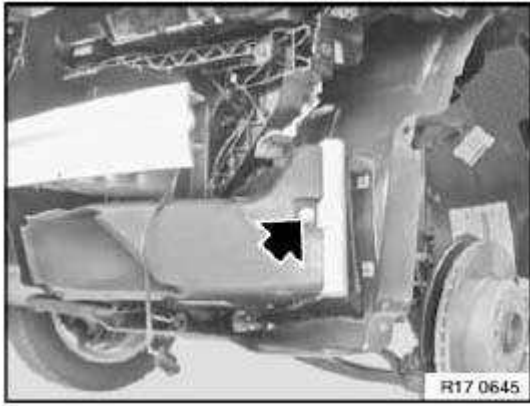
Locating Mount Air Duct On Engine Oil Cooler
